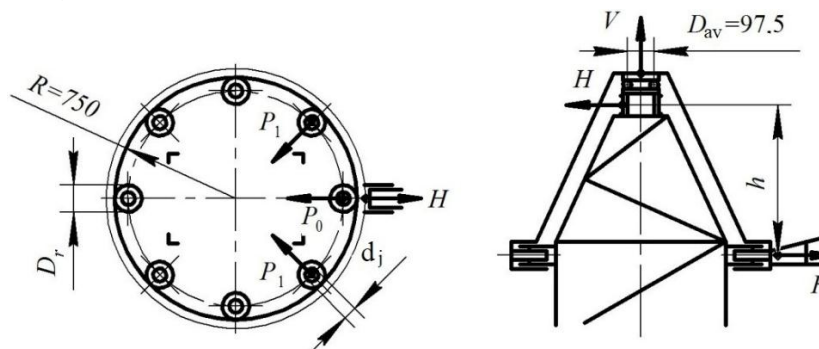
Design diagram of the slewing gear of a construction tower crane with fixed rollers on roller bearings, thrust bearing and top slide journal
